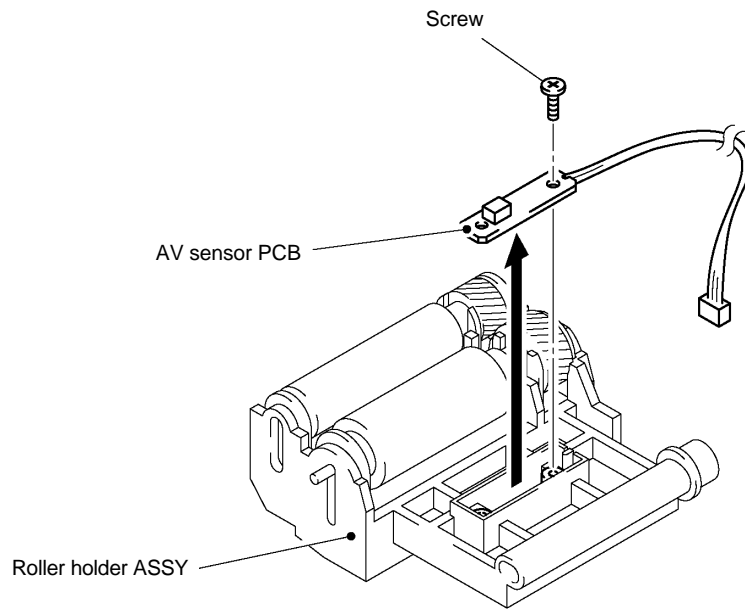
Disassembling the Head/Roller Holder Unit (3)
